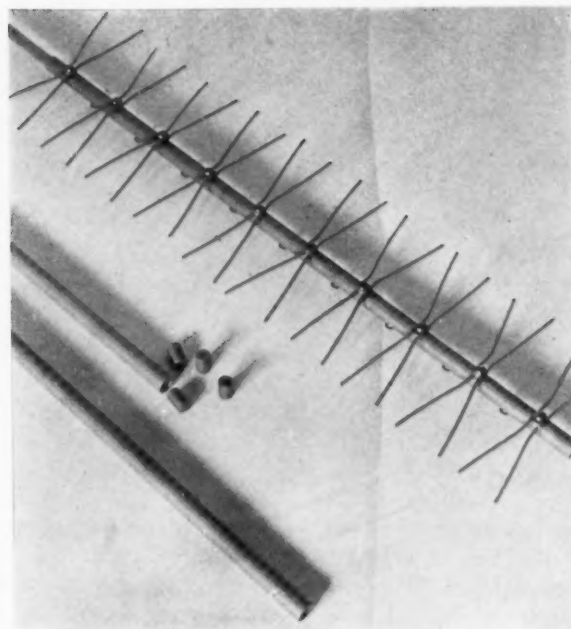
Single rack showing laminated tubing and plugs used in its assembly.
